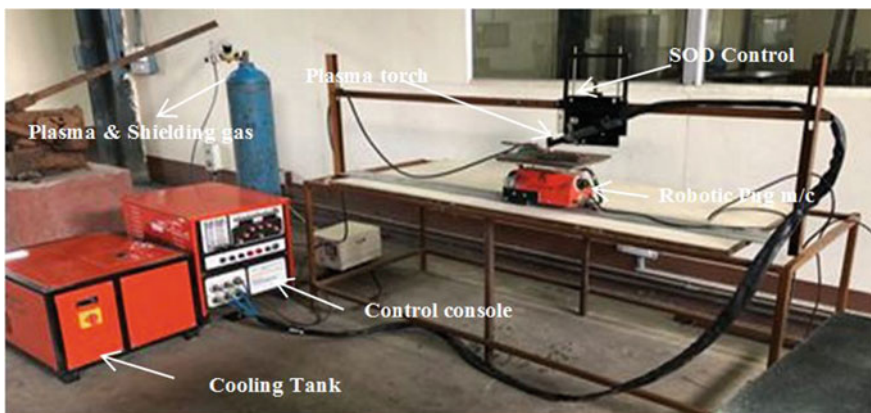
Microplasma arc-welding (MPAW) setup
